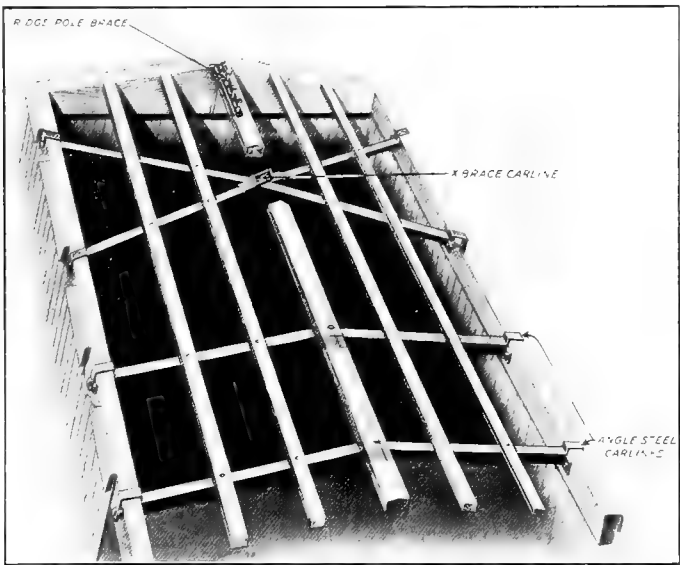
Model System of Roof Bracing. Chicago-Cleveland Car Roofing Company.
